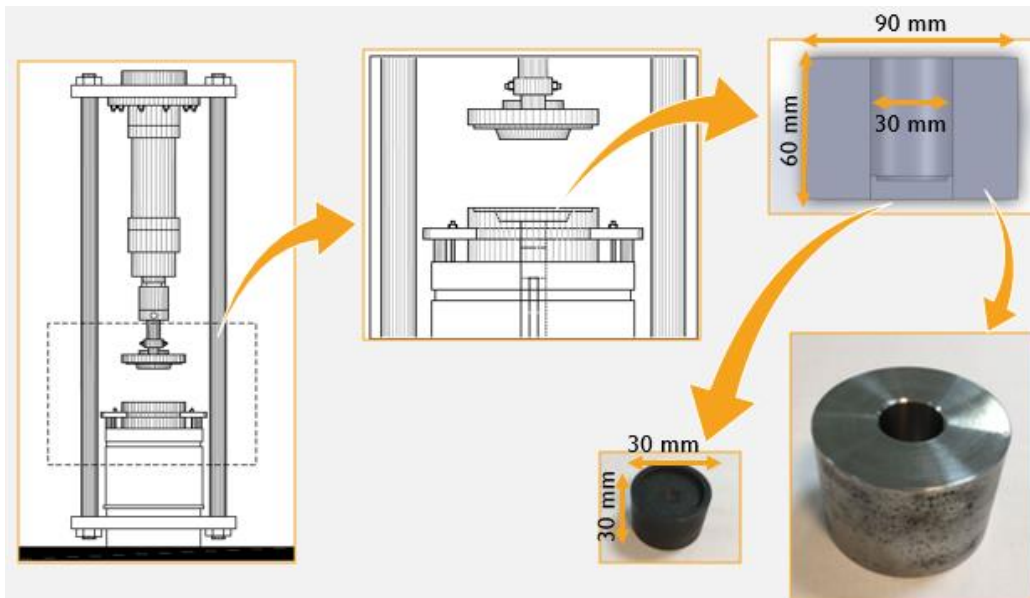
The schematic view of the squeeze casting machine and special molds near-net shape casting.
